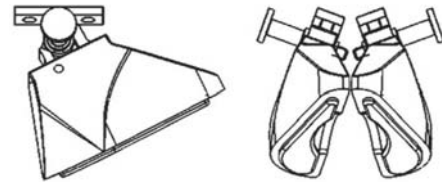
Inverted V-shape of the CAD Model of the Prototype [7]
